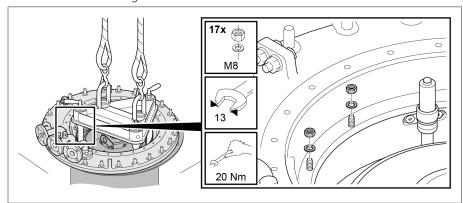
Screwing the top part of the on-load tap-changer head to the bottom part
